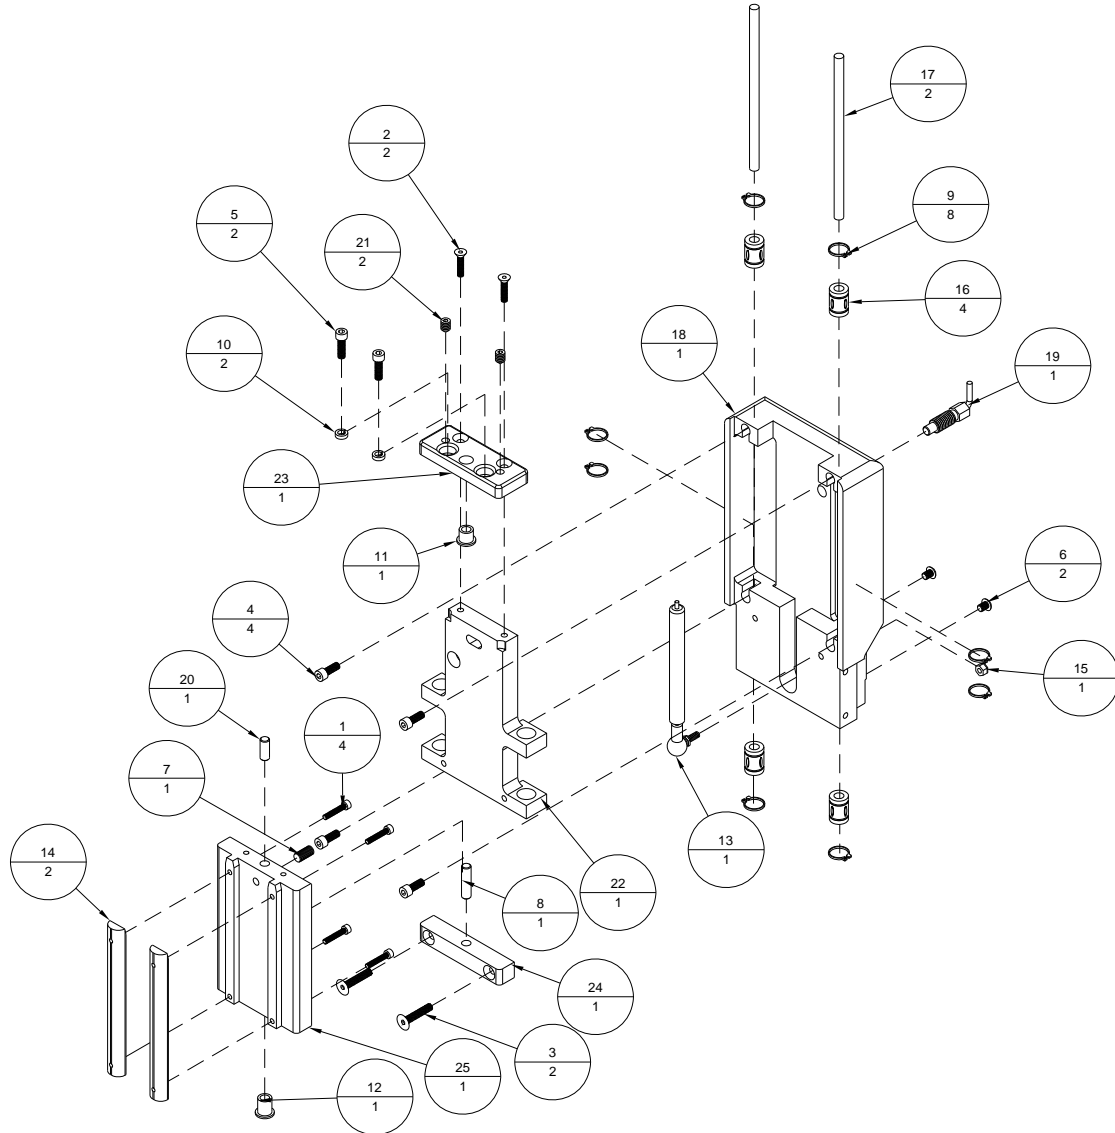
9104008A - Printhead Support Assembly, Angle
